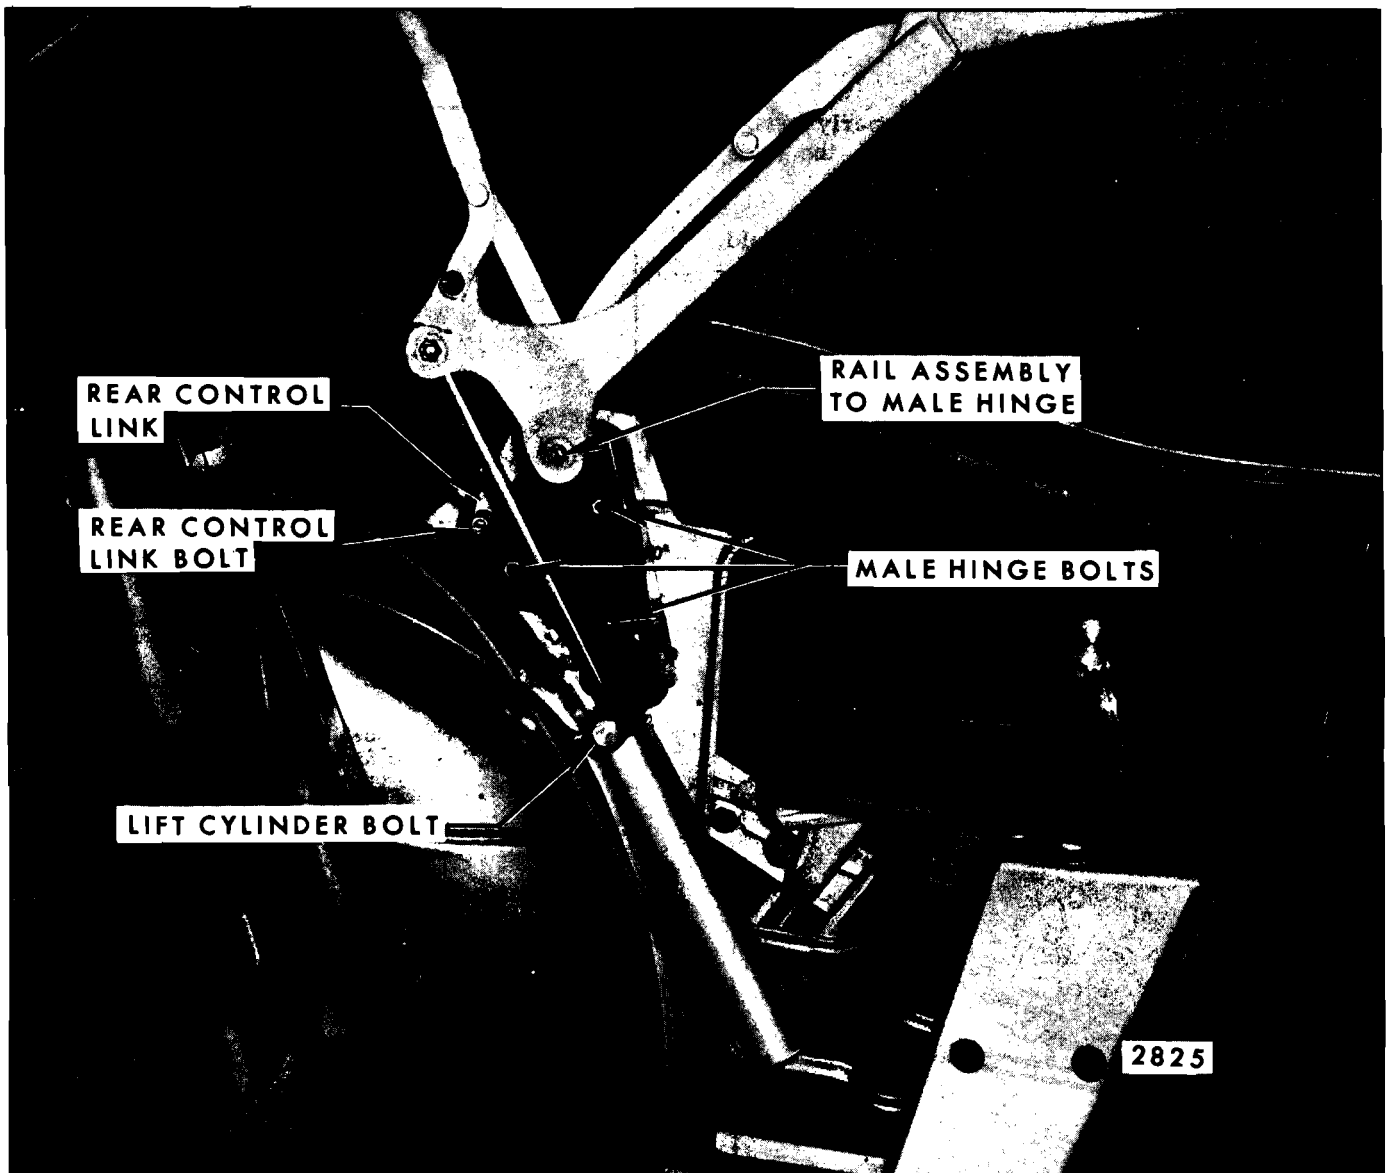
Folding Top Linkage Attachment - "A" Styles Shown, "B & C" Typical
